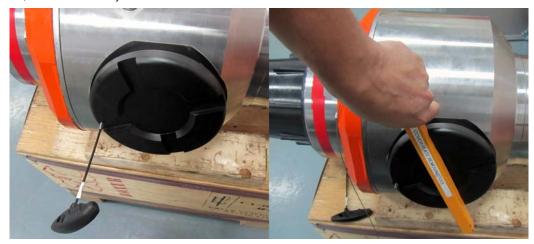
Removing Electronics-Side Cover Plate
